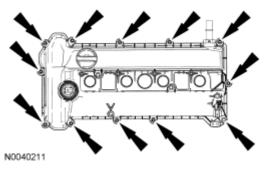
Locating Valve Cover Retainers Courtesy of FORD MOTOR CO.
